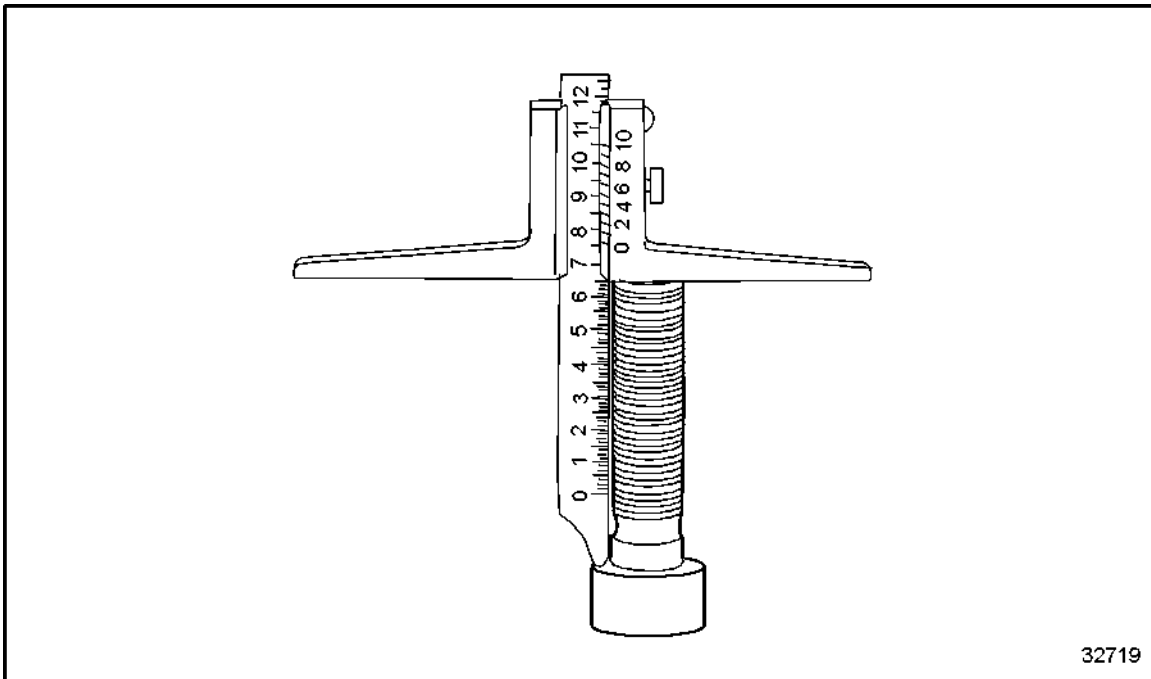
Measuring Shaft Length of Bolt with Depth Gage
